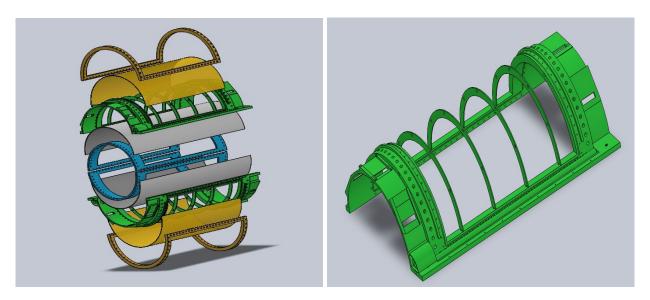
<u>Left:</u> Expanded assembly of the cylindrical  $\mu RWELL$  prototype design. The blue frame is the inner clamp; the gray sheet is the composite  $\mu RWELL$ /readout foil mounted on a thin rigid support; the green frame is the main frame; the gold sheet is the drift foil; the orange frame is the outer clamp for the drift foil. <u>Right:</u> Zoomed view of the main frame with ribs that support the drift foil and endcap rings that support the front-end electronics cards.
